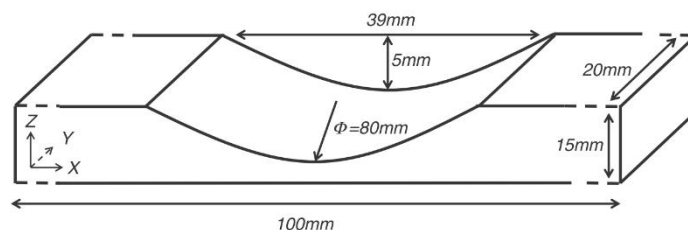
Geometry of the substrate machined for laser cladding deposition.
